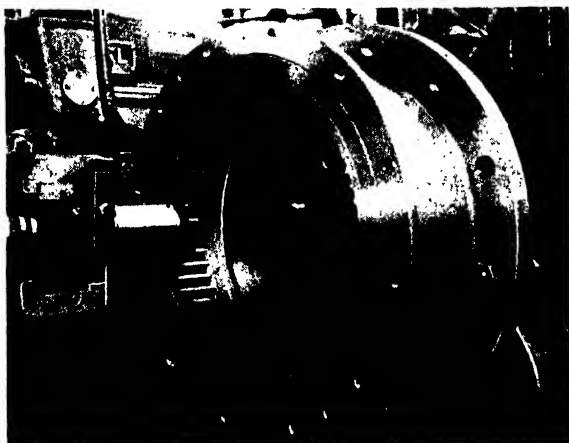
Straight-tooth internal gear being cut on a Sykes machine.
